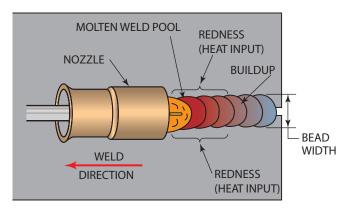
Watch the trailing edge of the molten weld pool.
